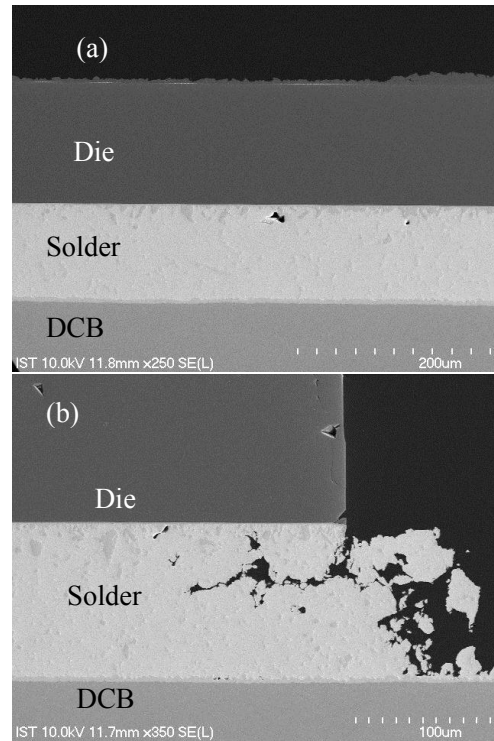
(a) SEM picture solder device after 21,800 PCT – center (b) SEM picture solder device after 21,800 PCT – corner
